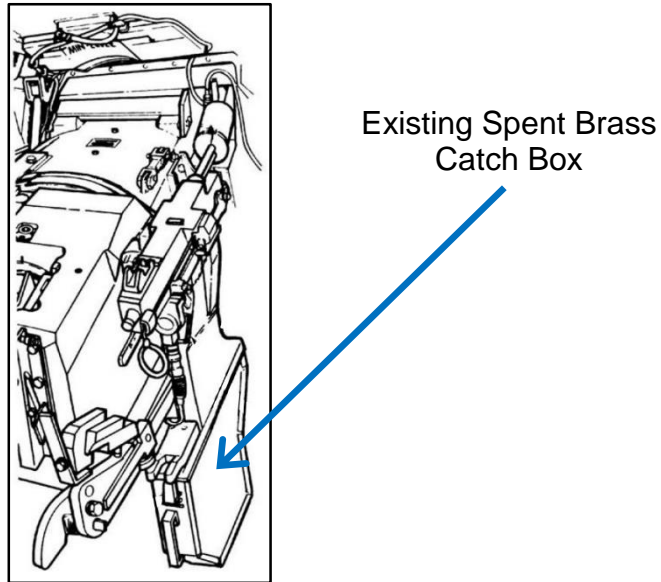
Existing Coaxial Machinegun Spent Brass Catch Box.
